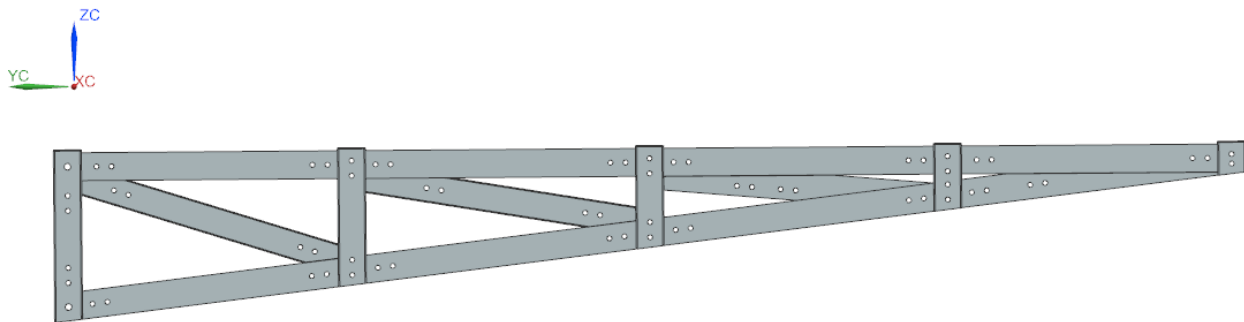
The full truss member layout with new beams on far left and right to help distribute loads to the main nodes
